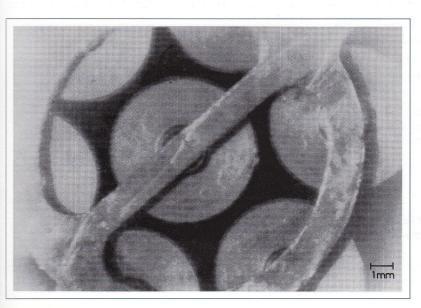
An example of presence of a macrocrack at the welded joint of central fuel pin with end plate No. 2
